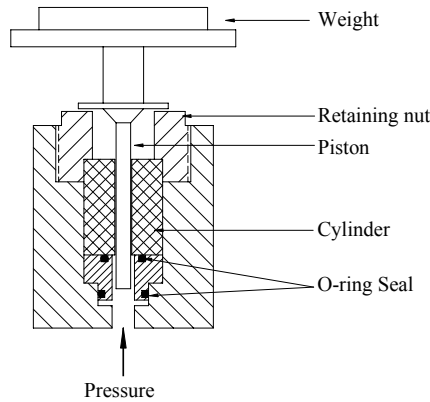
Schematic sketch of the simple type piston-cylinder assembly under study.
